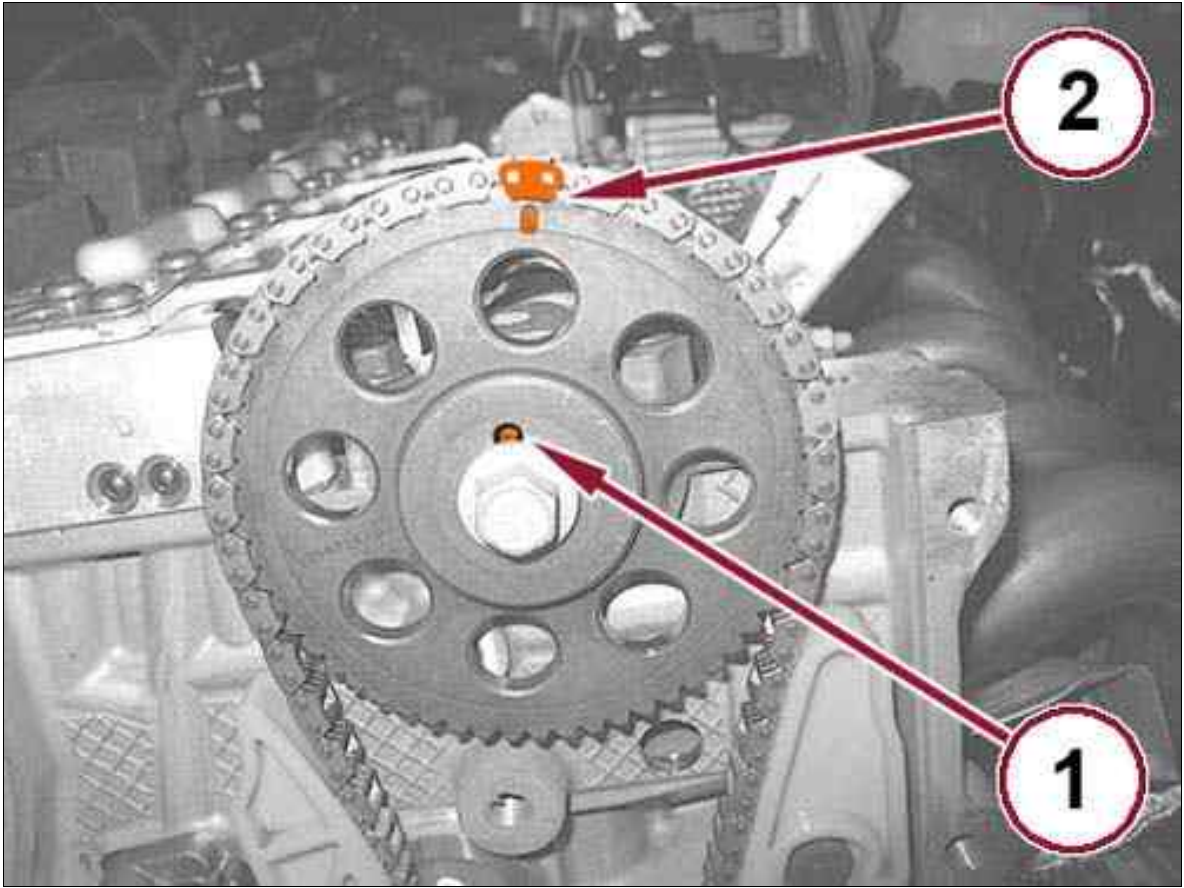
Positioning Crankshaft Key At "9" O-Clock Position & Marking Chain Link At Point Marked On Crankshaft Gear
